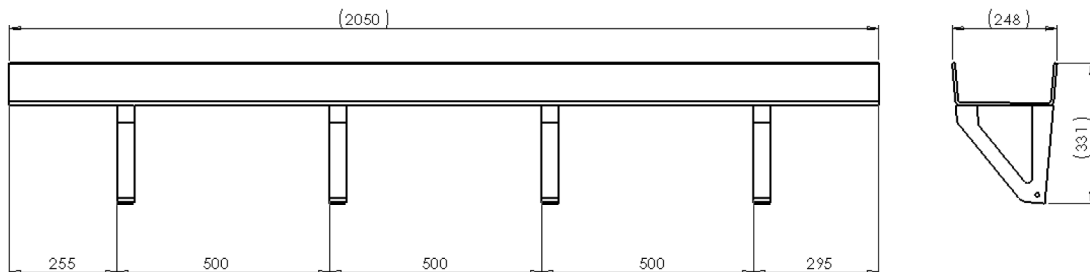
Spar and hinge bracket assembly drawing (millimetres).
